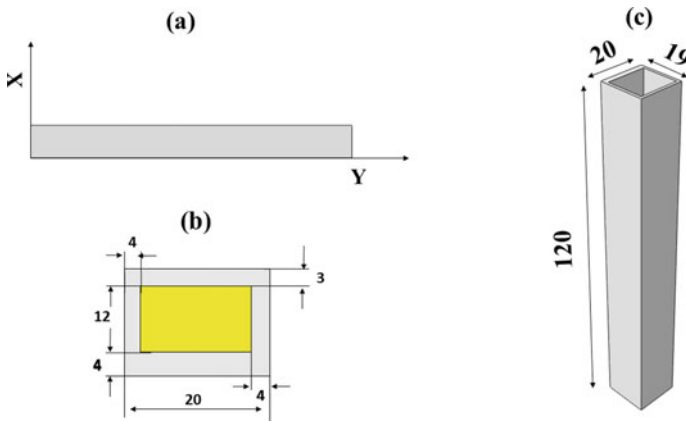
Plane SPA with a  $x$ - $y$  plane view, b chambers' cross-sectional view, and c isometric view
